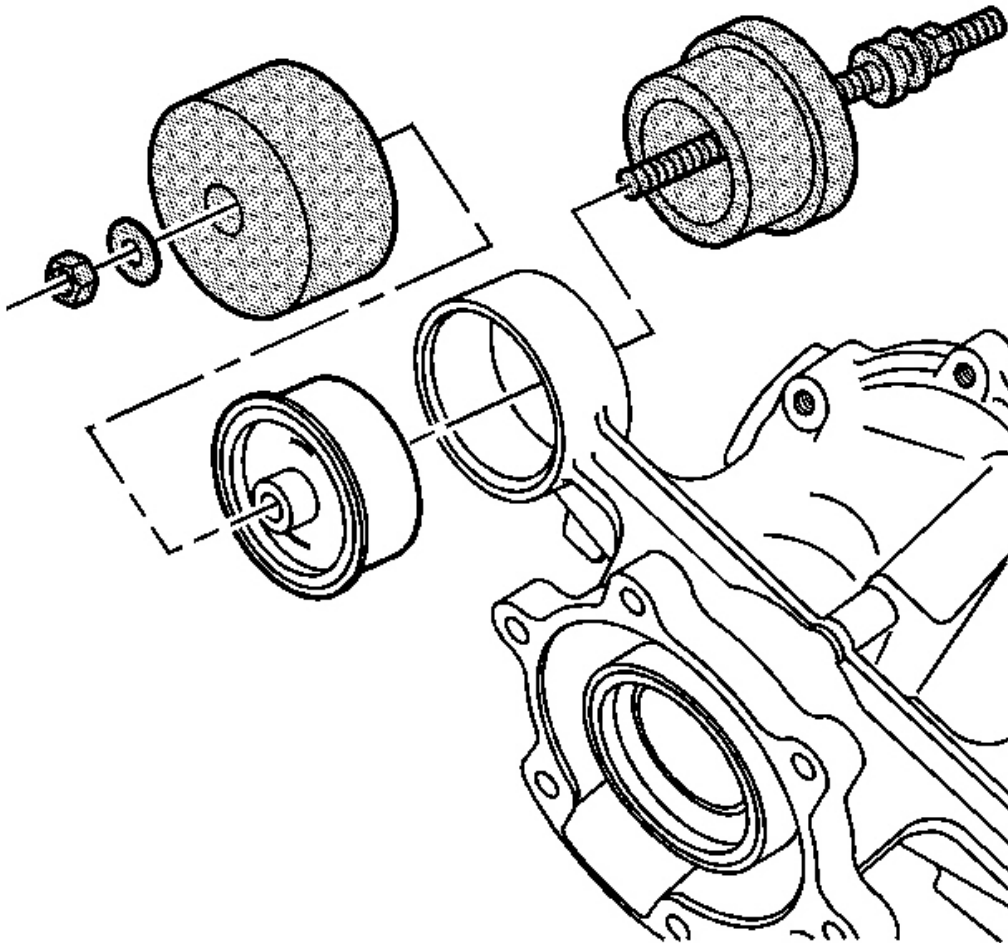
Removing Bushing If Damaged or Worn Out
